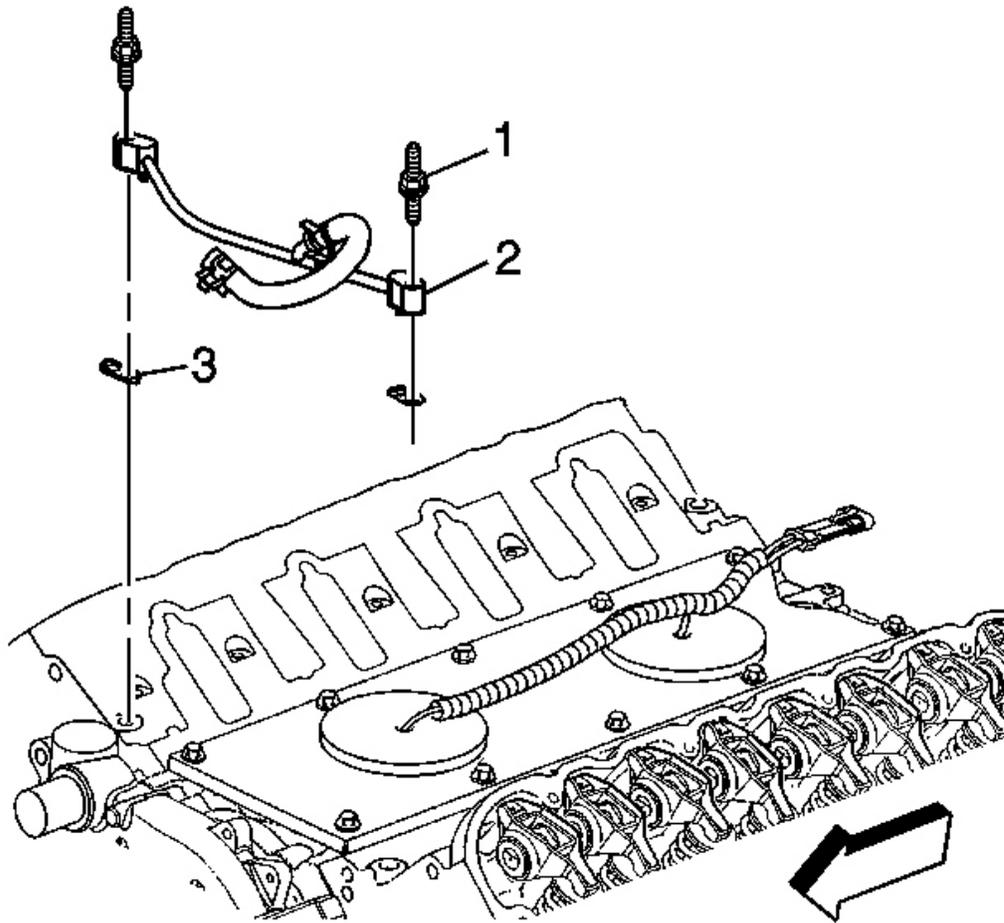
Coolant Air Bleed Pipe, Studs & Gaskets
